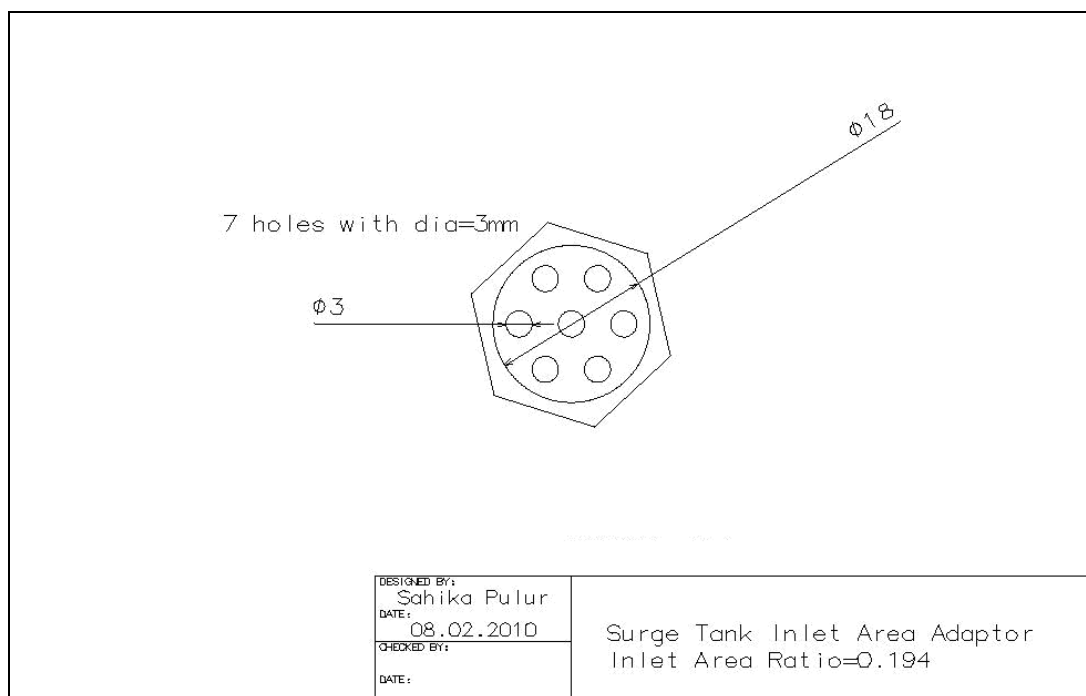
Technical Drawing of Adaptor with $r=0.19$
